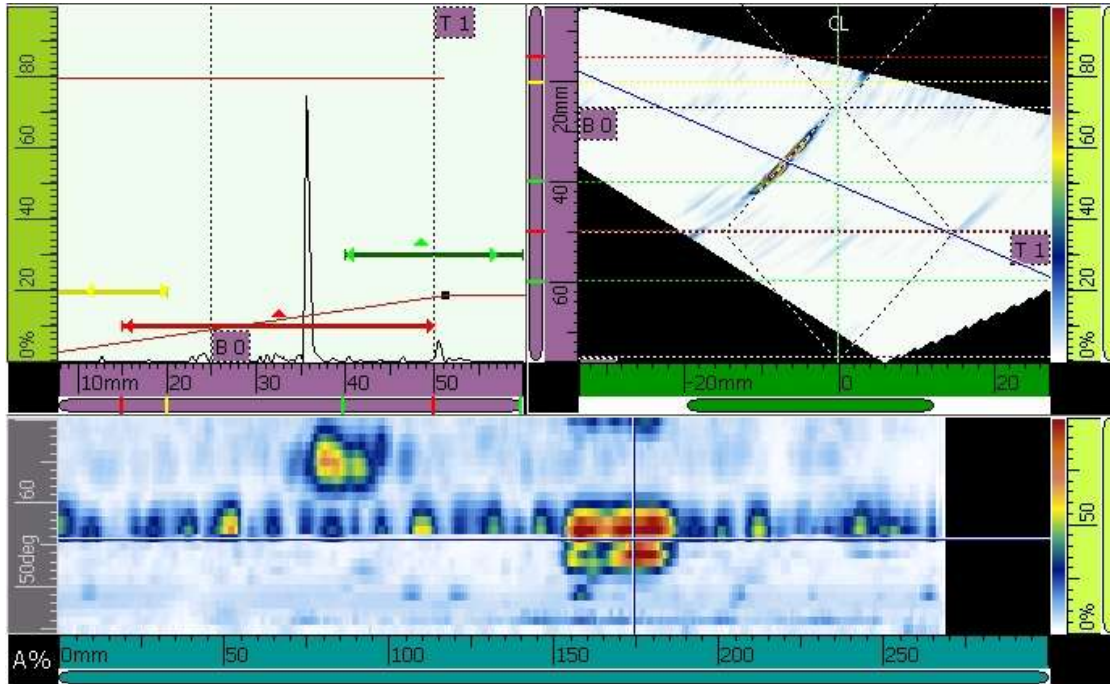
Defect map for lack of fusion observed with weld joint
